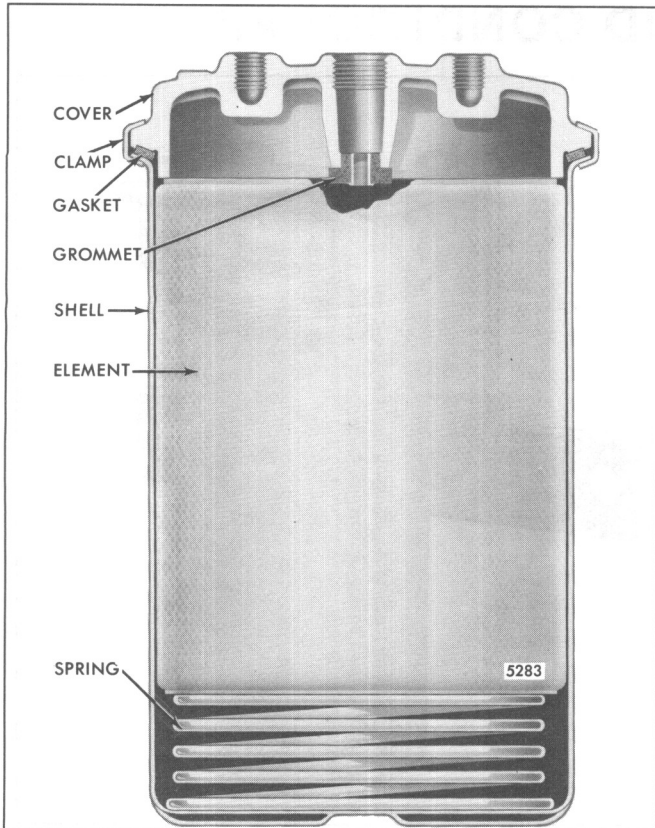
Coolant Filter and Conditioner (Clamp-On Type)
